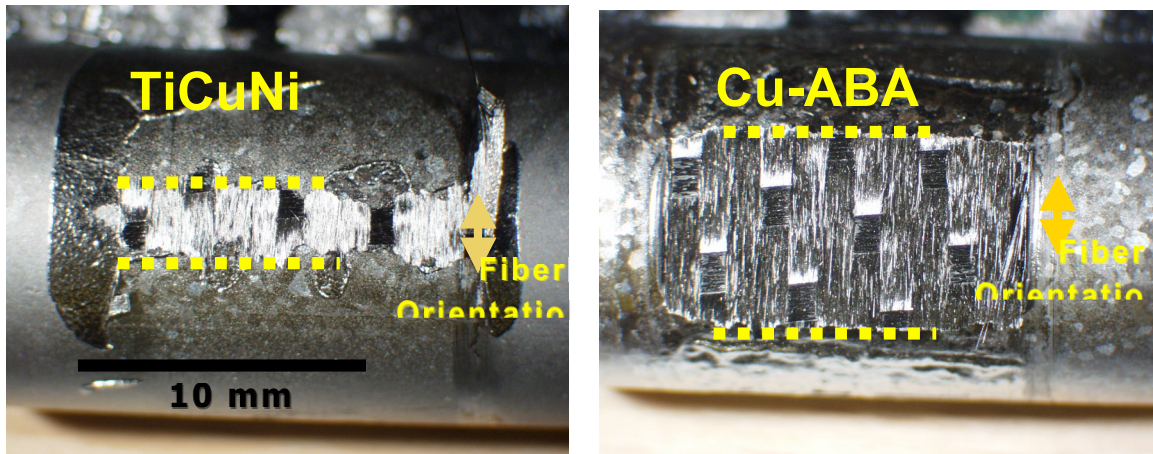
Typical joint structure fracture surfaces which adhered to the Ti-tube for (a) TiCuNi braze material and (b) Cu-ABA braze material.
